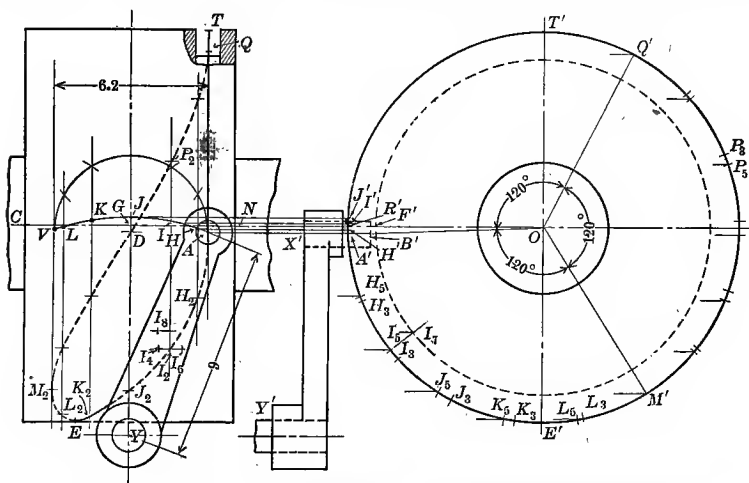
PROBLEM 16, CYLINDRICAL CAM WITH SWINGING FOLLOWER ARM
